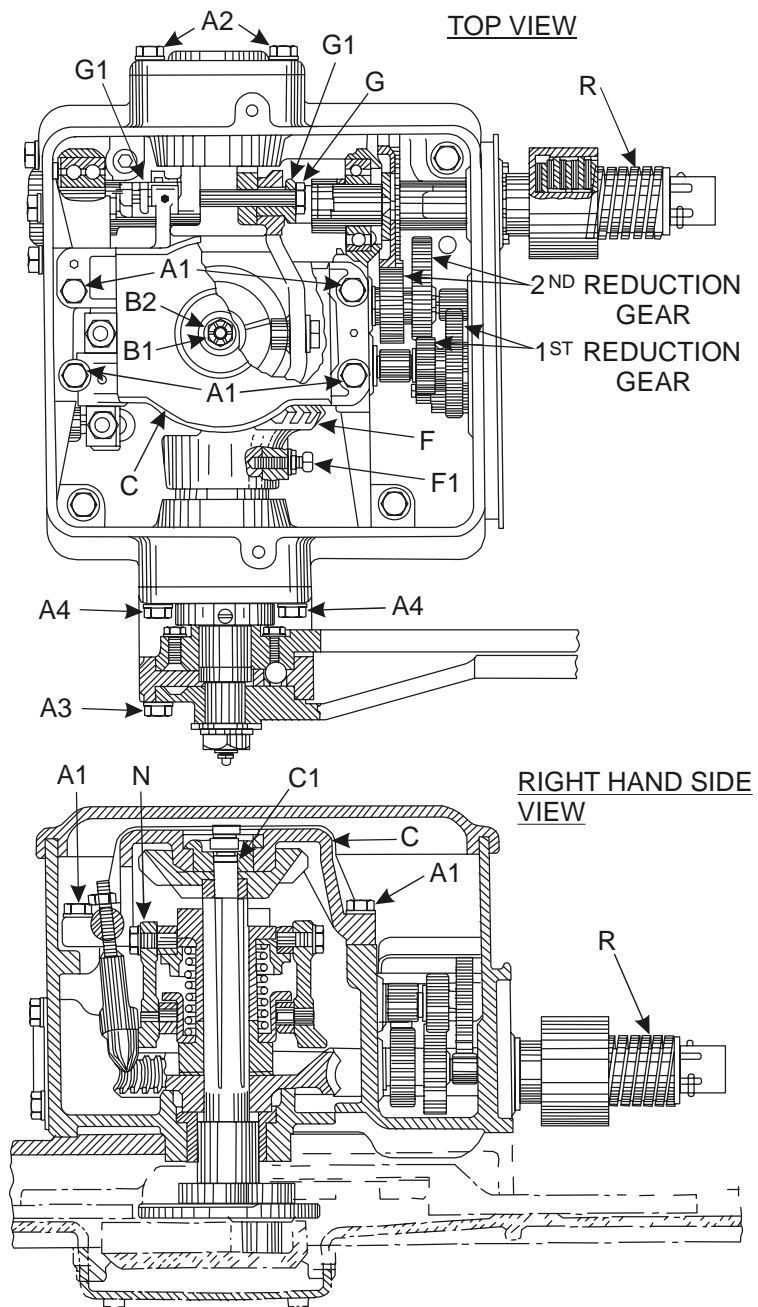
Sectional View of Gearbox Looking from Motor End
